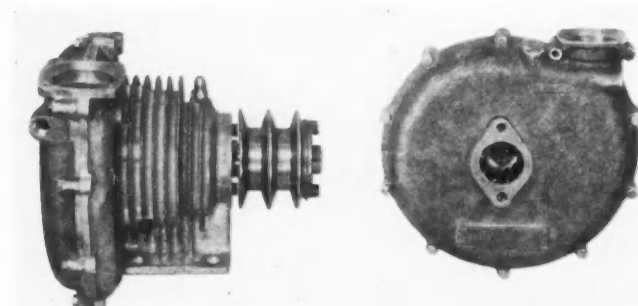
Planetary Drive-Unit of Fig. 8 Built into a Unit which Is Designed To Be Driven by Multiple V-Belts
